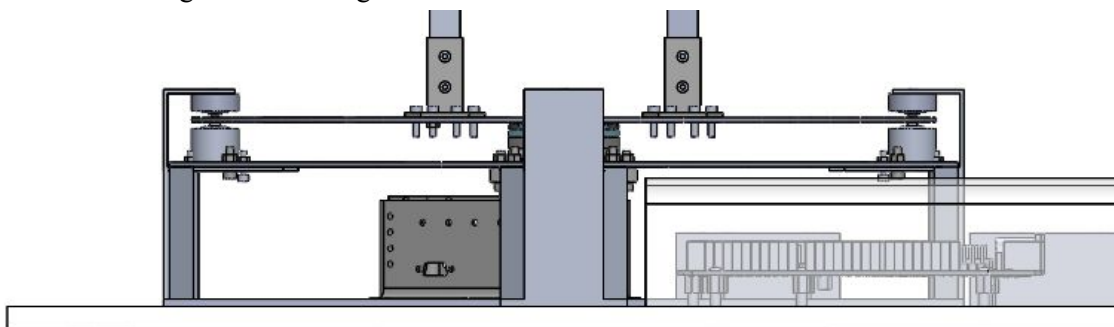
Yaw motor housing on assembly with D sub 9 slot. This will be used to connect a cable to the pitch motor.
